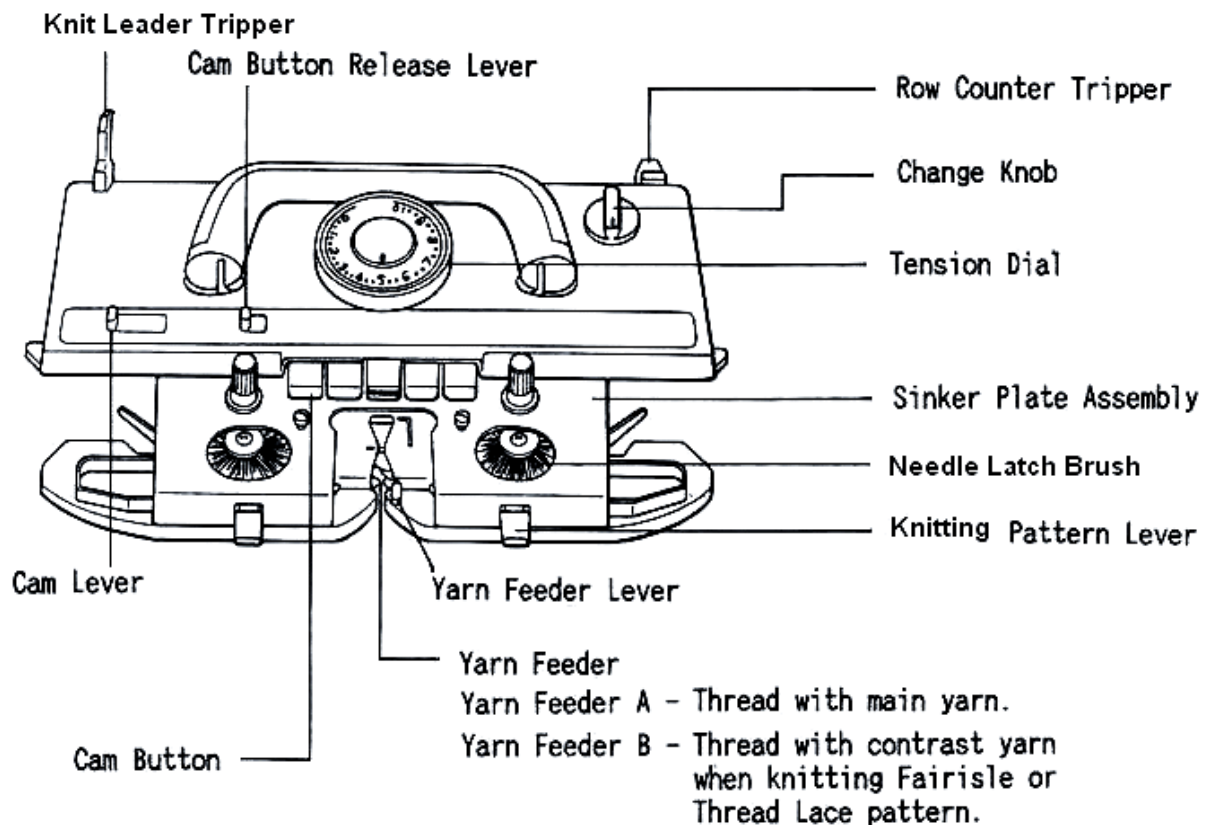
The cam carriage of computerized double flatbed knitting machine
